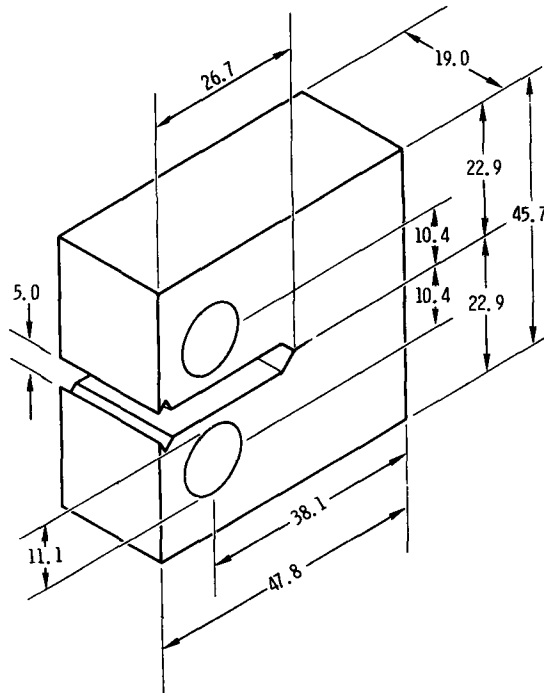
Configuration and nominal dimensions, in millimeters, of the specimen.
